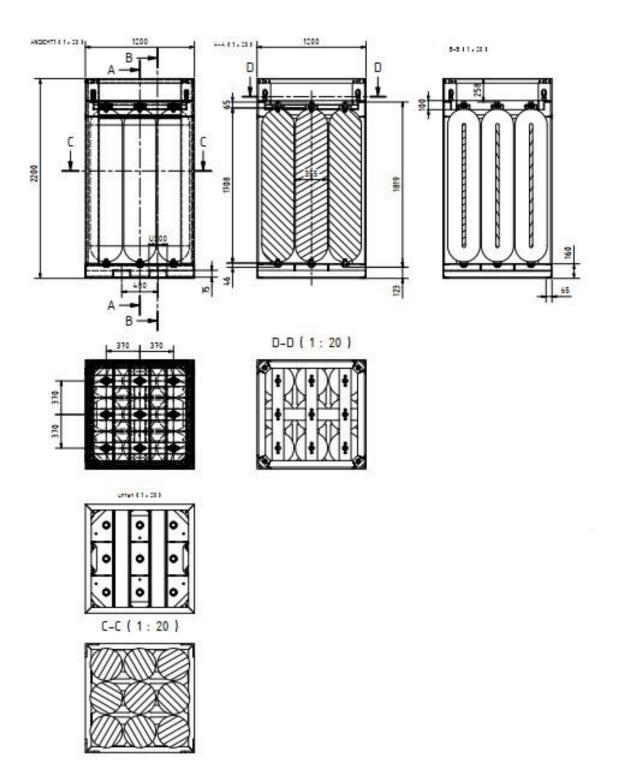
900 bar storage tank system technical drawing (views and dimensions). Model KPJ-017-BG-002 [NPROXX, no date]
